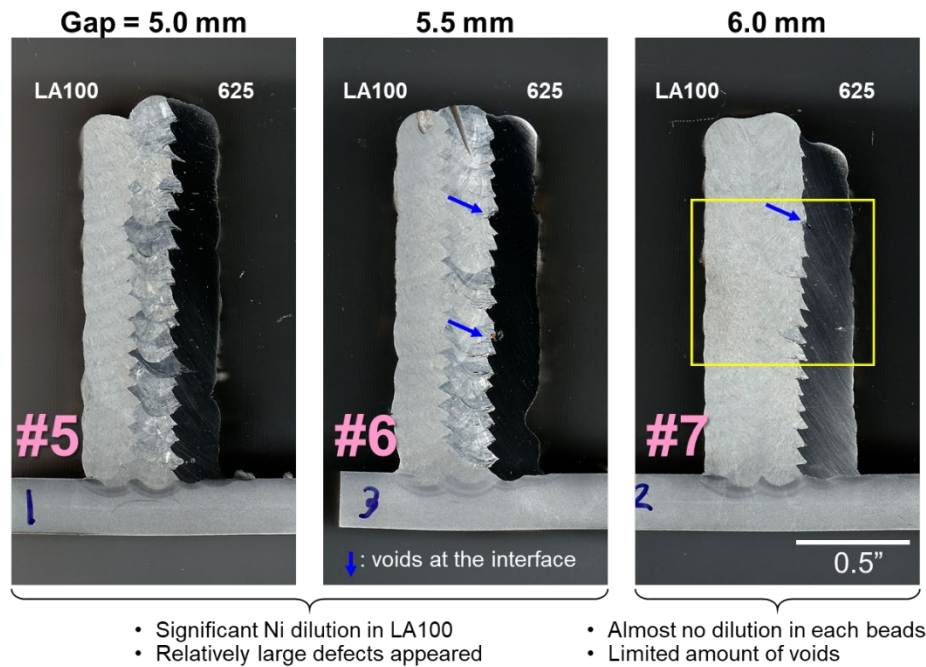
Cross-sections of the trial walls #5 through #7, sectioned from near center of the wall lengths.
